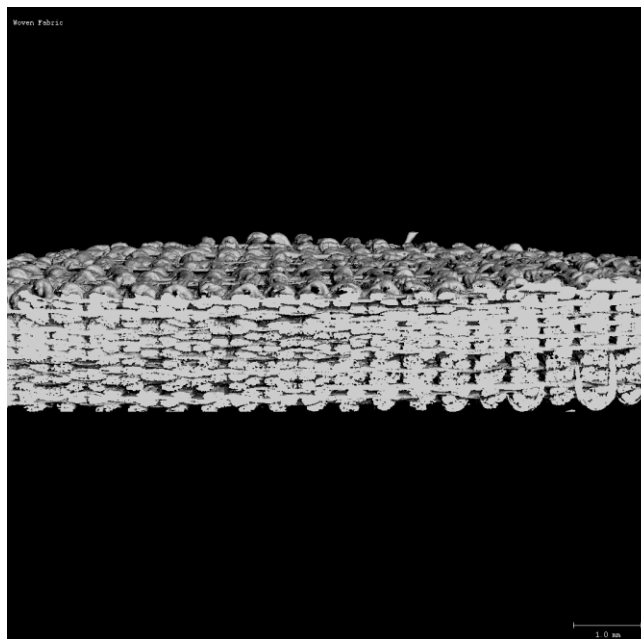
Sample produced from a welded fabric coupon (SN 3786 shown).
